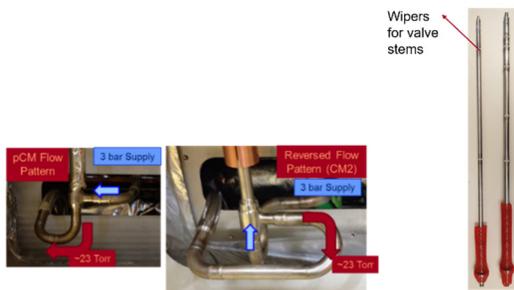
Wipers added to valve stem and reverse configuration welding of the valves to reduce TAO.
